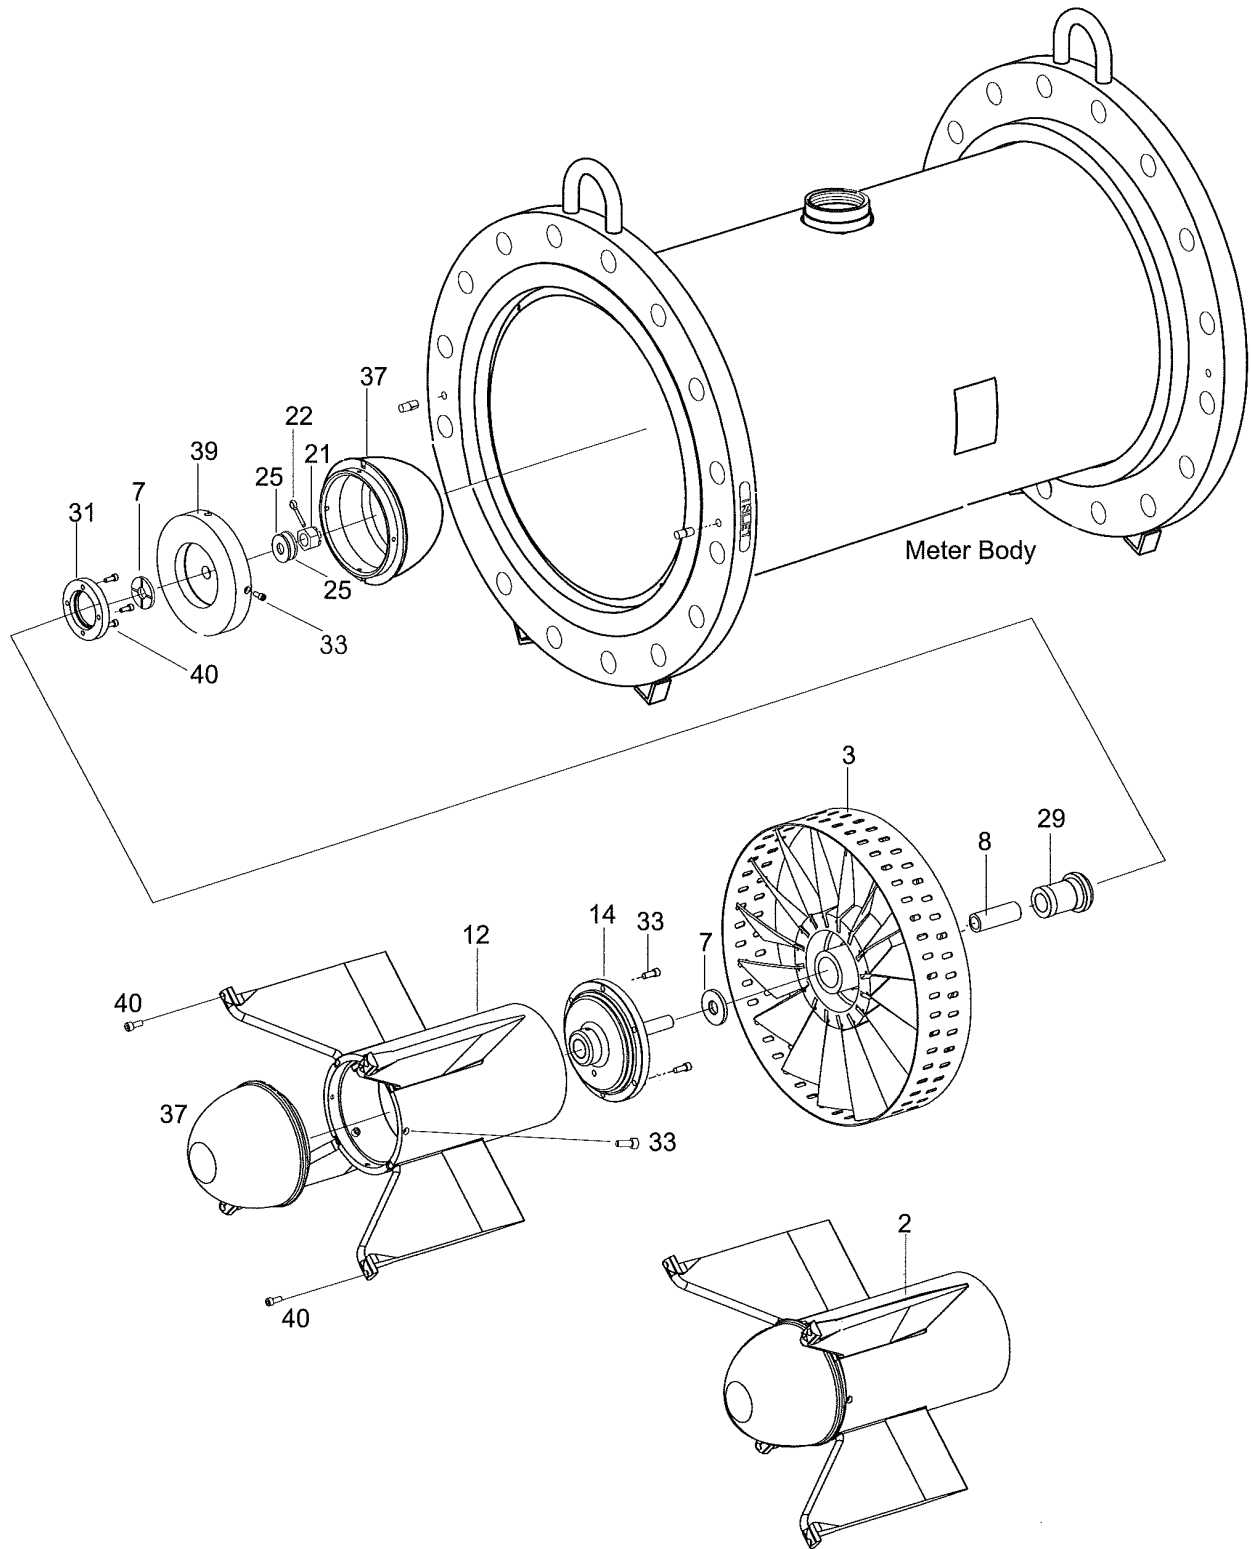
10" through 16" Sizes Assembly Illustration
